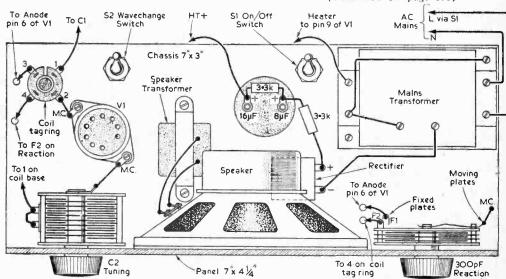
Layout, and dimensions, of the chassis and front panel.
